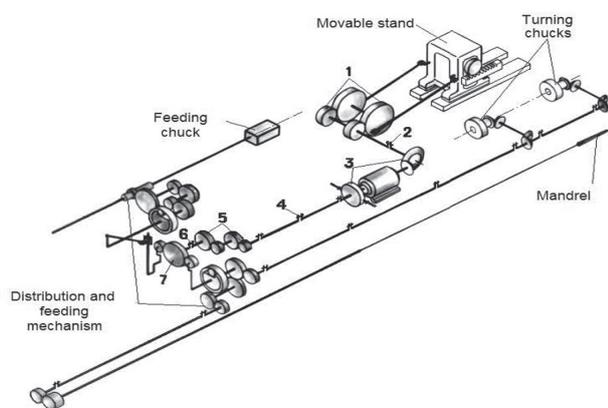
The kinematic scheme of cold pilgering mill with a feeding and turning mechanism of the gearbox type: 1 – twinned crank-slider mechanism for working stand moving; 2 – power plant; 3 – electric motor and angle gearbox with a brake; 4 – drive shaft; 5 – gearbox distribution and feeding mechanism; 6 – cam and lever mechanism and its connecting shafts and couplings; 7 – distributor shaft
